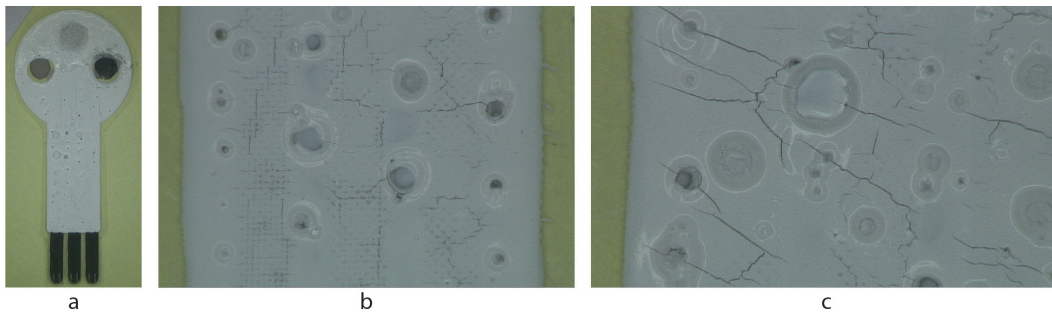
Sensor cracks, (a) total sensor, (b) & (c) zoomed in on the cracks.
